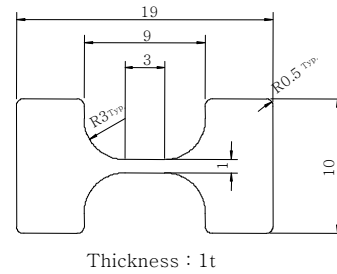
Shape and detailed dimensions of a micro tensile specimen
